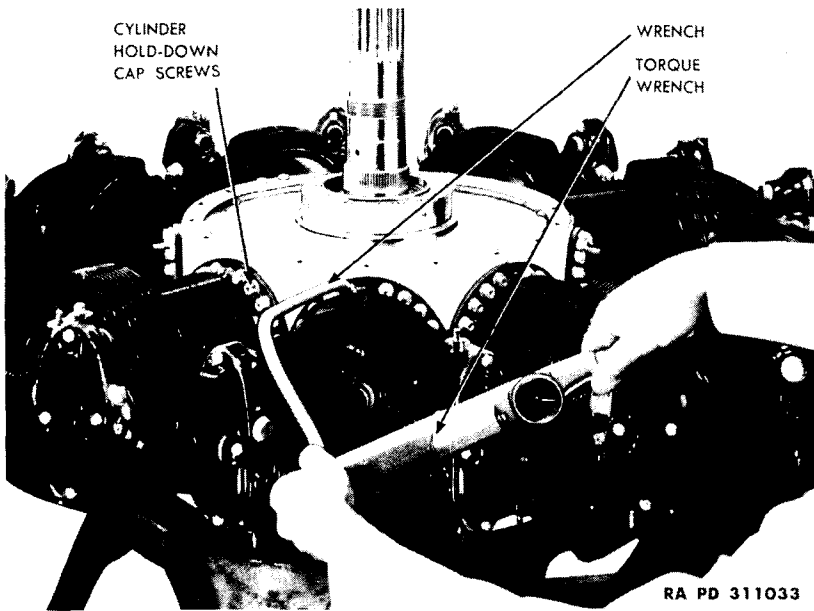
Tightening Cylinder Hold-down Cap Screws, Using Wrench 5A2268
